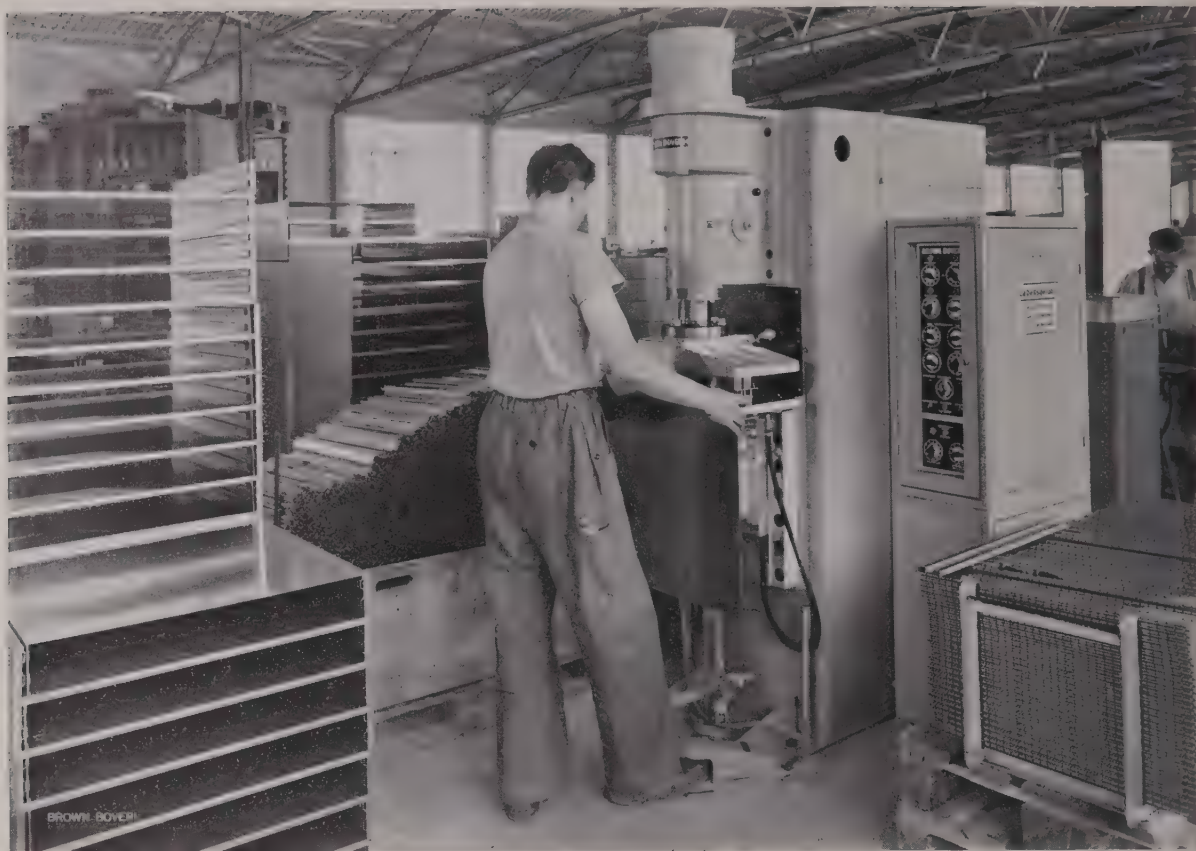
Pneumatically operated projection welding machine type BU 30 being used to weld parts of tool-cabinet drawers
